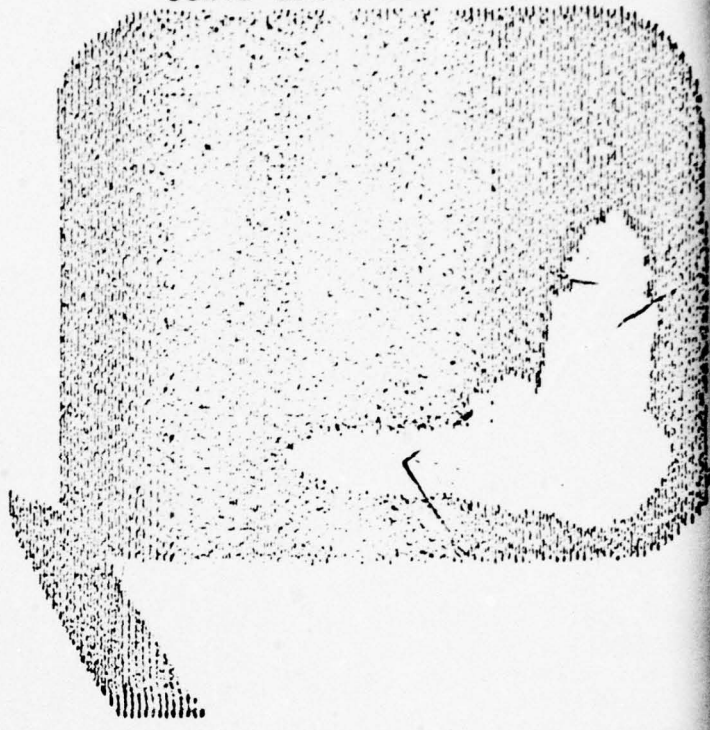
C-SCAN RECORDINGS OF MACHINED TEST BLOCK "A"
